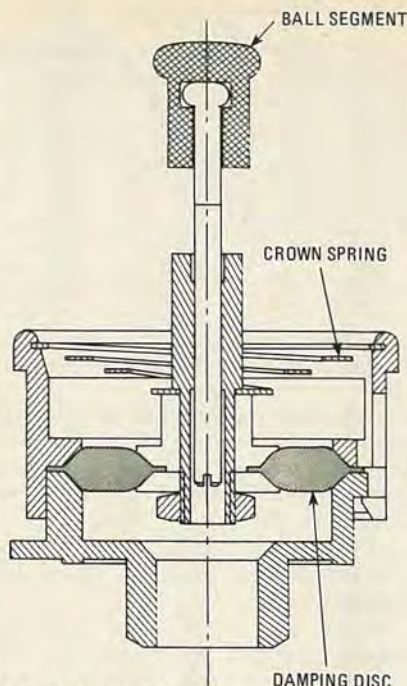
CROSS-SECTION view of the ball-segment mounting arrangement used by Thorens.
